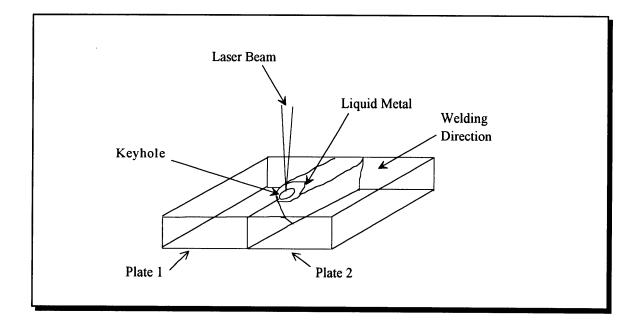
Keyhole Laser Beam Welding Process.
